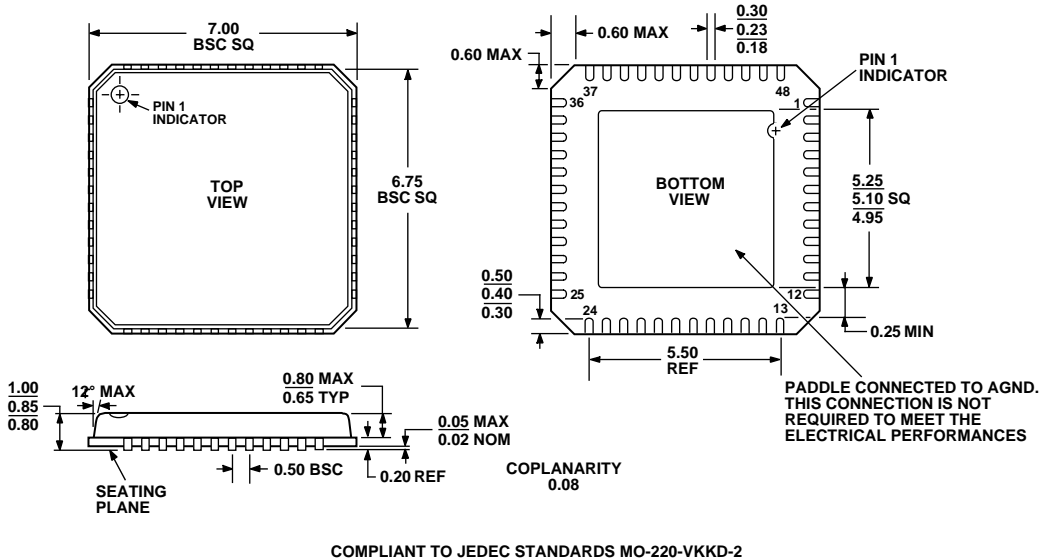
48-Lead Frame Chip Scale Package (LFCSF) [CP-48]
